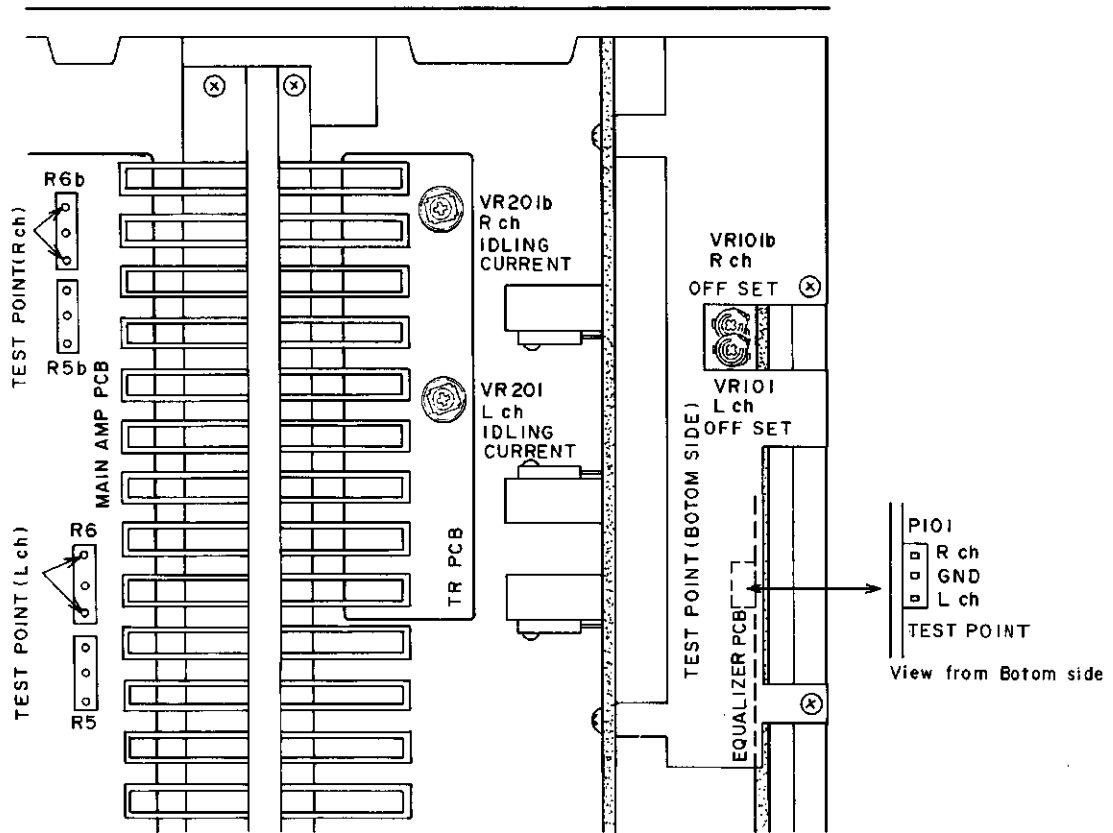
Idling current, OFF-SET Adjustment parts and Test points
